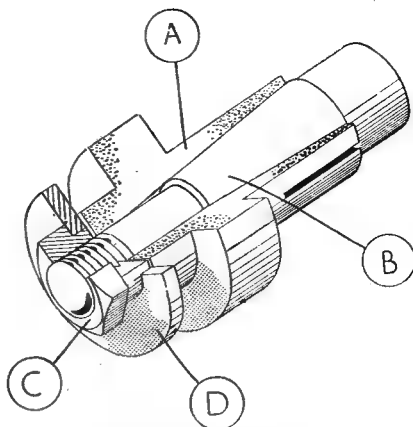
Shouldered type of adapter : "A"—the body ; "B"—draw-bolt ; "C" and "D"—draw-nut and washer
